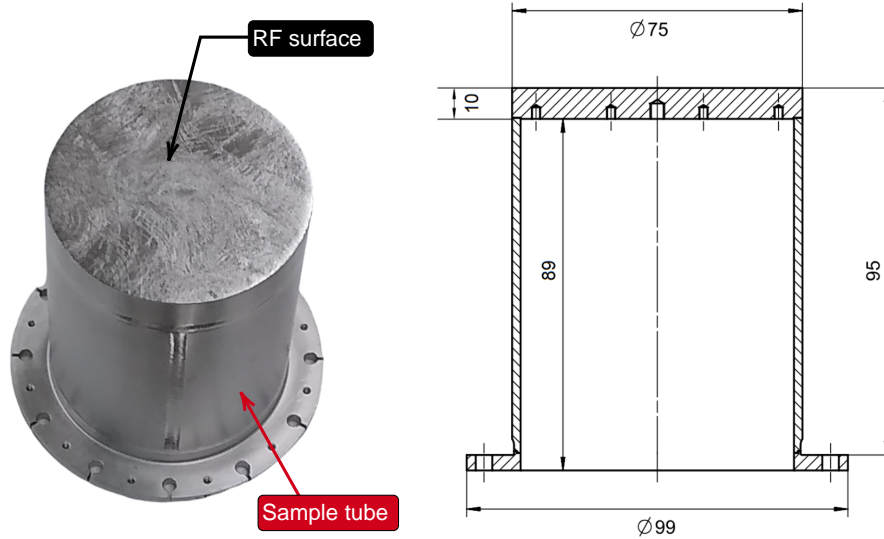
Left: Flat cylindrical QPR sample, with the RF surface ideally being the only part exposed to the electromagnetic field. Right: Cross-sectional view of a QPR sample, with units indicated in millimetres.
